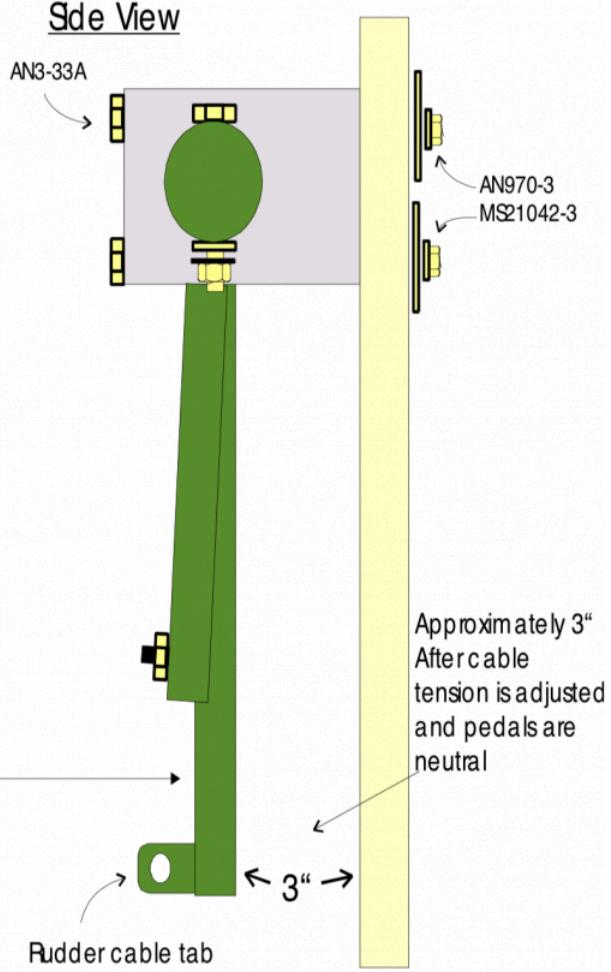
Toe Brake / Rudder Pedal Assembly
